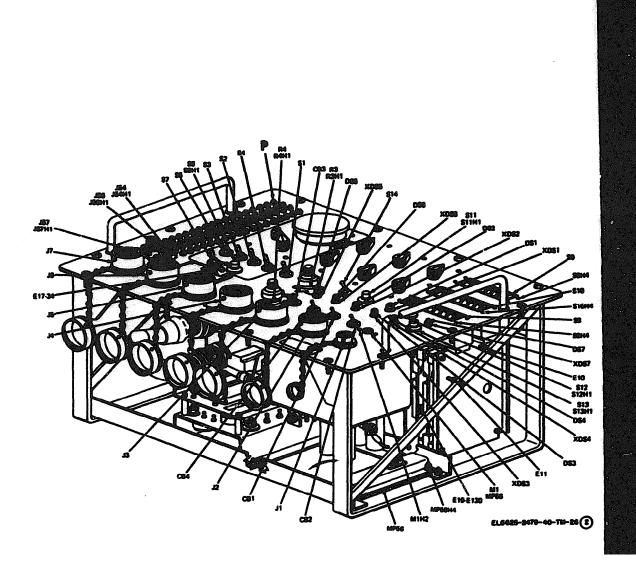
Panel assembly 1A3, parts location (part 2 of 5).
